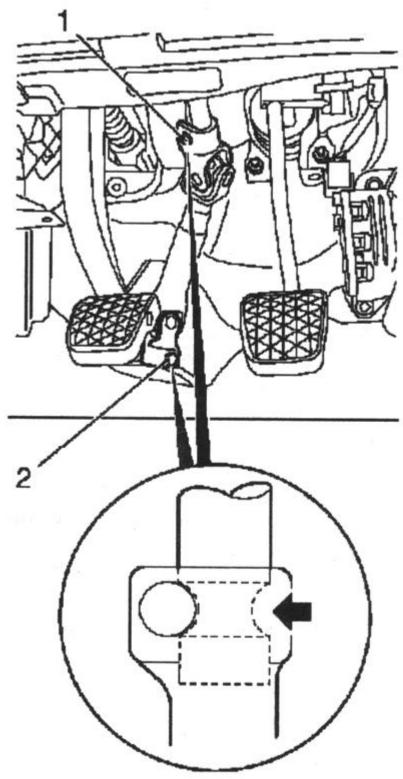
Clamping Bolts steering co-Lonkila: 1,2 - clamping bolts
